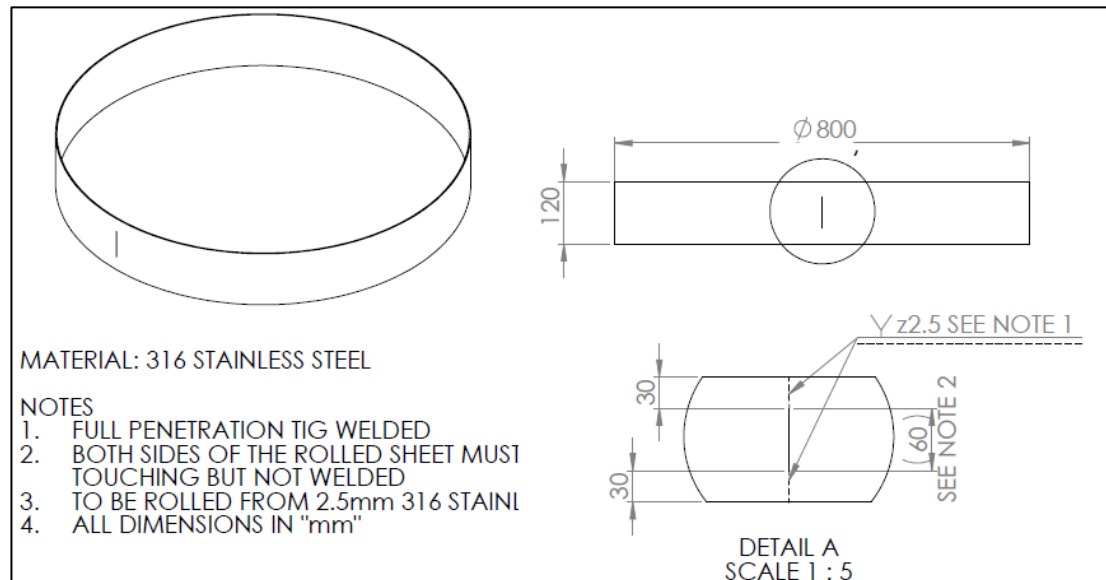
Manufacturing drawing used to fabricate the intentionally defected sample. (Figure is not scale)
